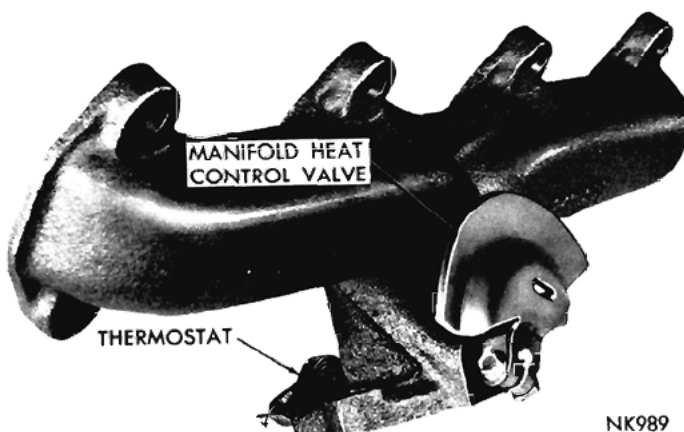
Manifold Heat Control Valve (318 Cu. In. Engine)
